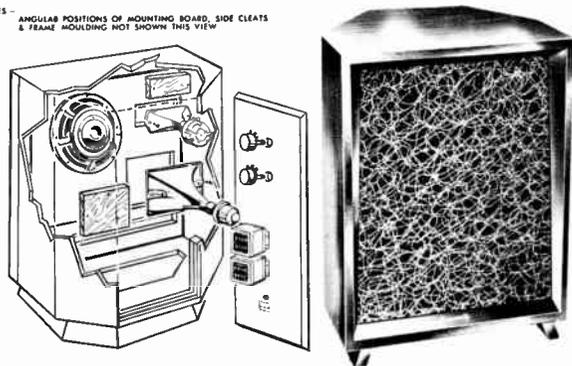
Cornerless corner horn loaded port bass reflex (University EN-12).
